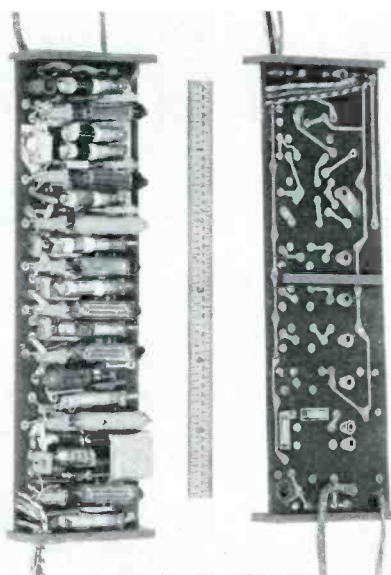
DETAILS OF COMPLETED CHASSIS UNIT
